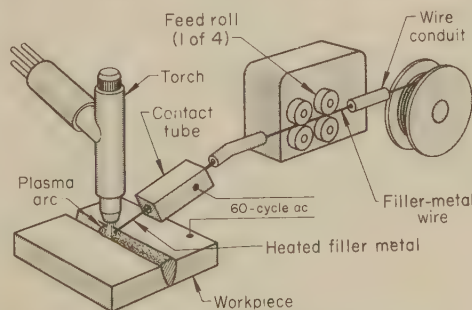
A system for automatically feeding hot filler-metal wire to the weld puddle
